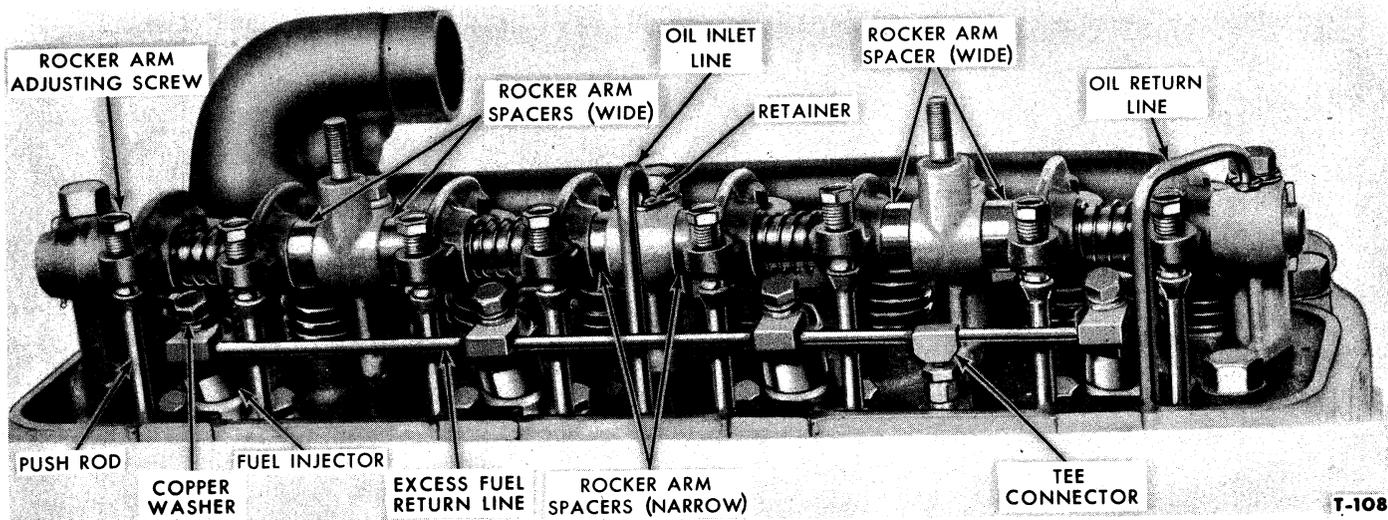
Diesel Engine With Rocker Arm Cover Removed
